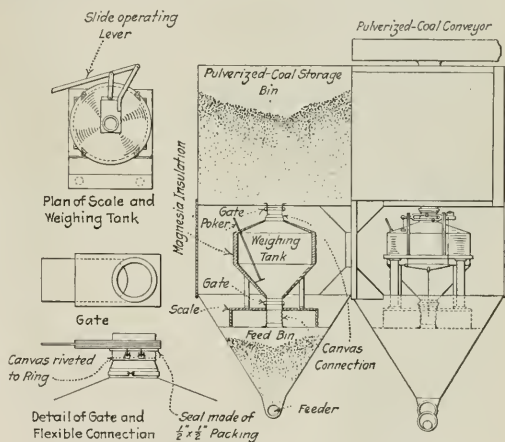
COAL-WEIGHING APPARATUS USED IN TESTS
